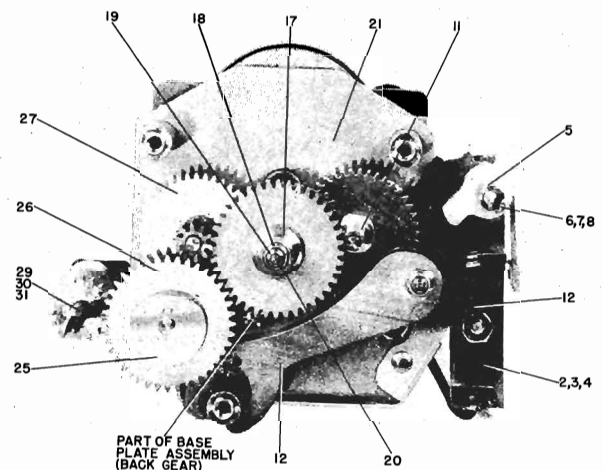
Front View of C51 Clocks—Front Plate Removed
